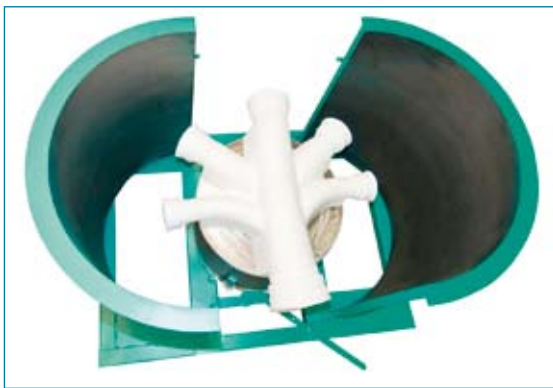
Production of the channel negative by the BFS block milling machine.
